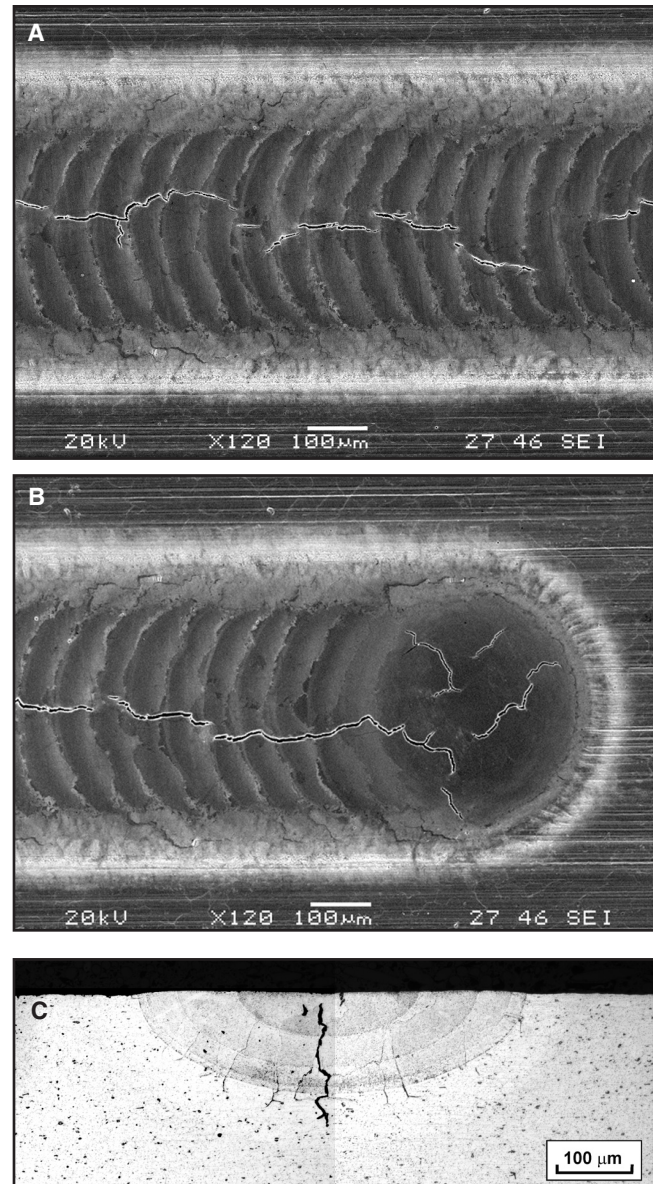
Intermittent solidification cracking in a weld made with a ramp-down pulse shape with main welding sector peak power density of 11.5 GW/m^2 and ramp-down gradient of 420 kW/s : A — Weld bead during steady welding; B — end of weld bead with crater cracking; and C — transverse section.
